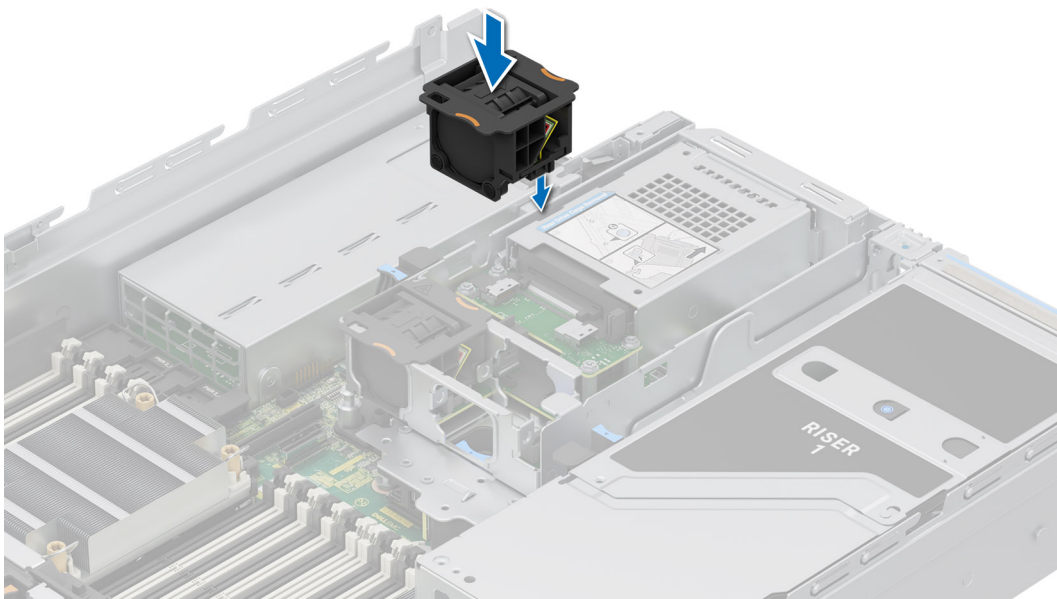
Installing a 2 x 2.5-inch rear drive module cooling fan
